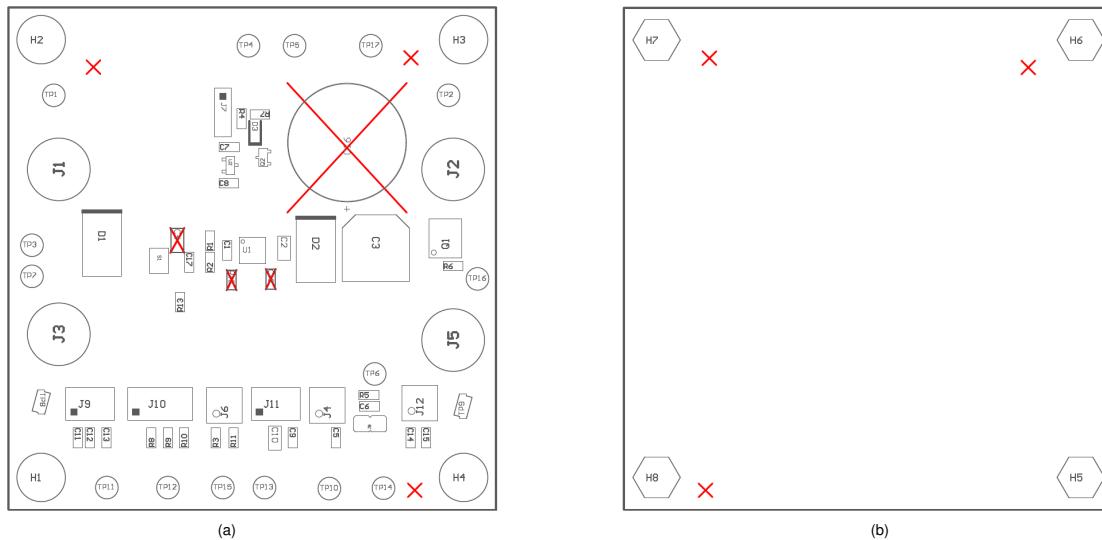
TPS25980EVM Board (a) Top Assembly (b) Bottom Assembly
